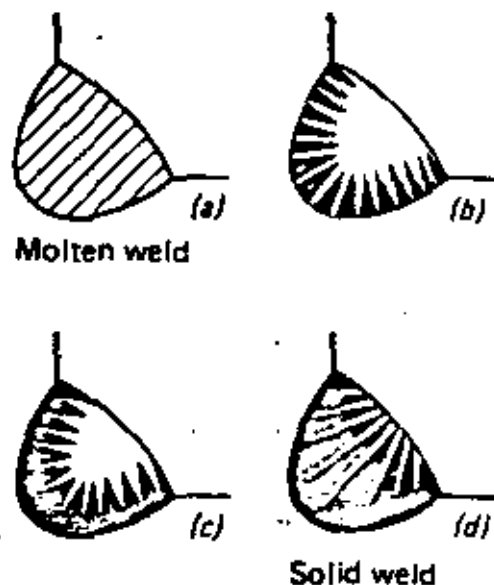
A molten fillet weld (a) starts to solidify along the sides next to the plate (b). Solidification proceeds as shown in (c) and (d).
